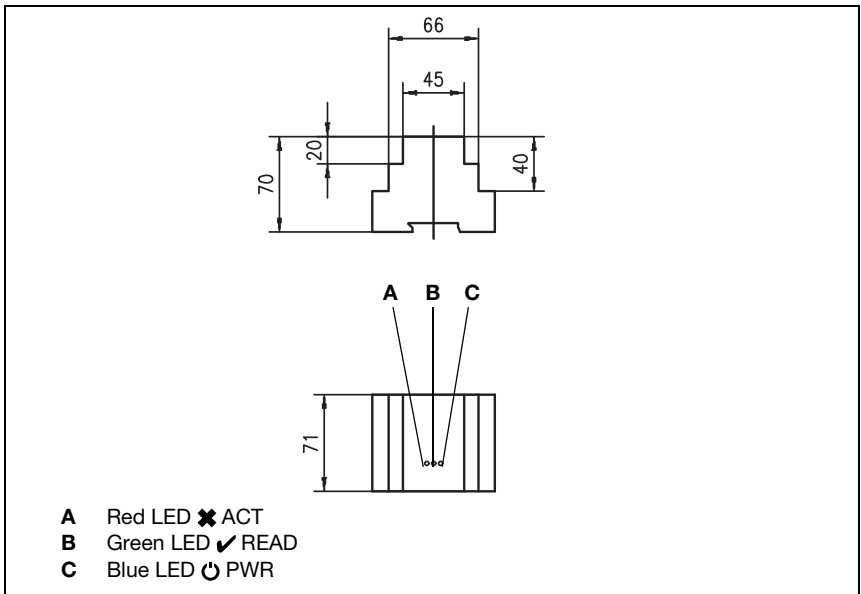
Dimensioned drawing of the IMRFU-1 connector unit
